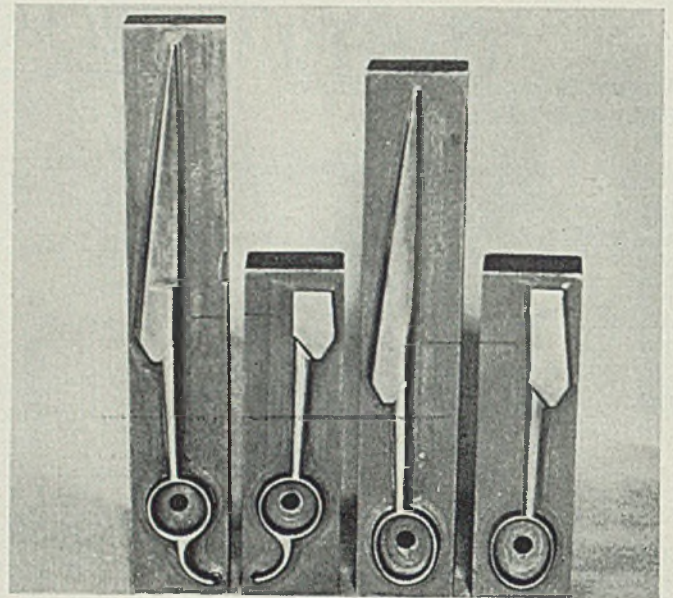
Hobs of the blades require extensive manual work in forming and finishing to close tolerances
